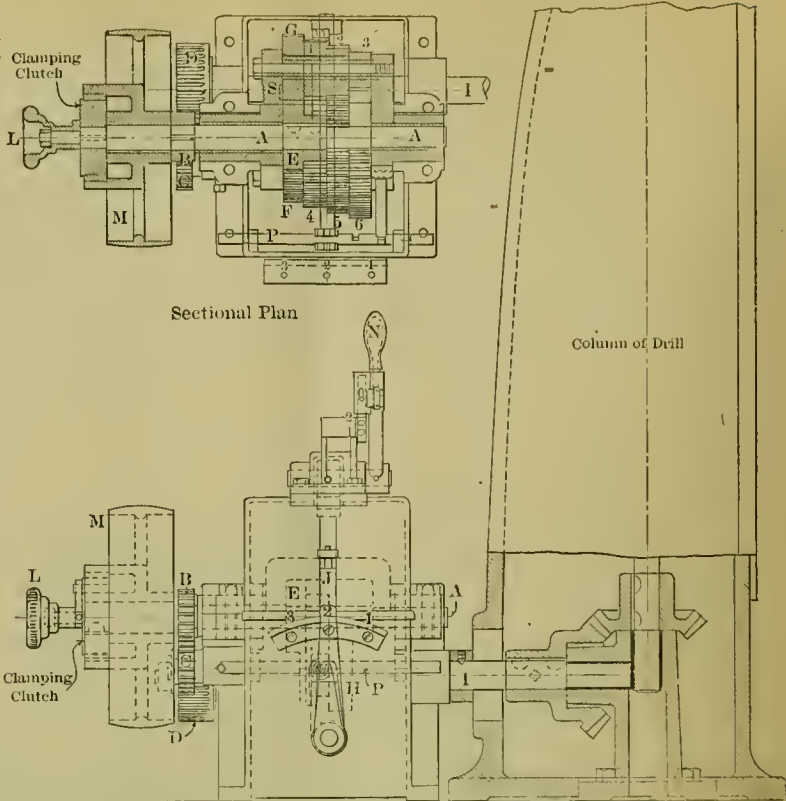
DETAIL DRAWINGS OF THE VARIABLE-SPEED DRIVING MECHANISM UPON THE FOSDICK RADIAL DRILL.
